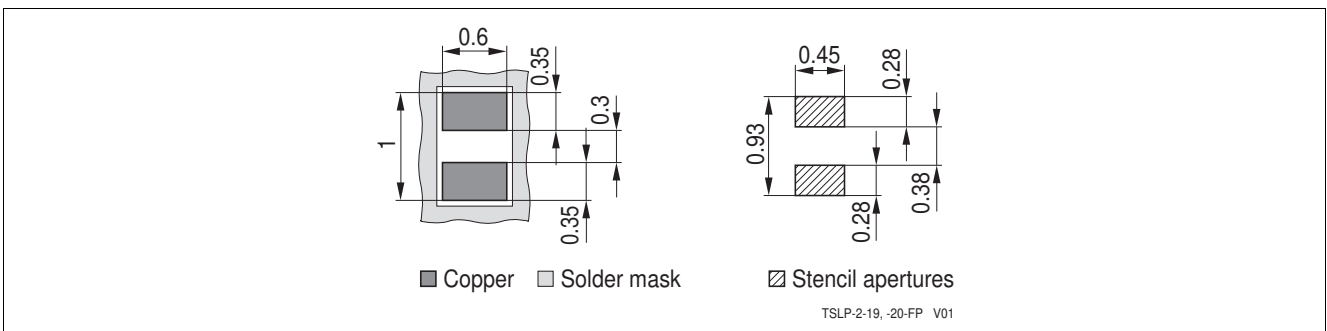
TSLP-2-20 Footprint (dimension in mm)
